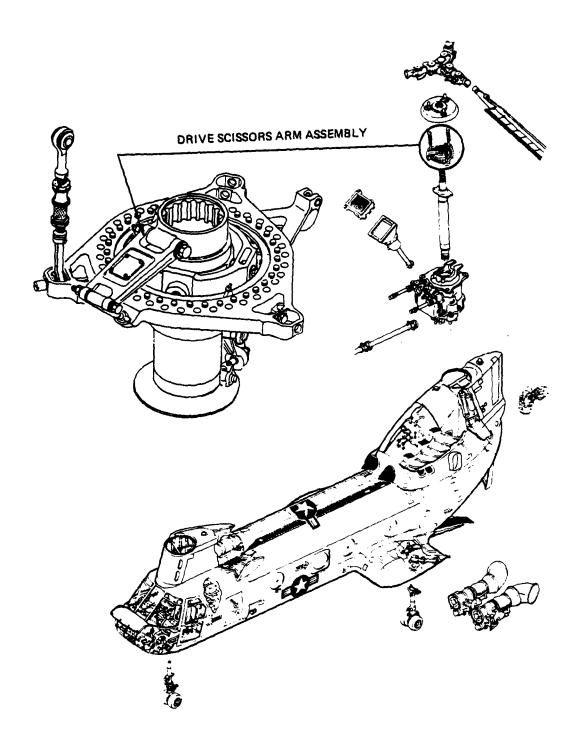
Location of Drive Scissors Arm Assembly With Respect to Helicopter Rotor Control System
